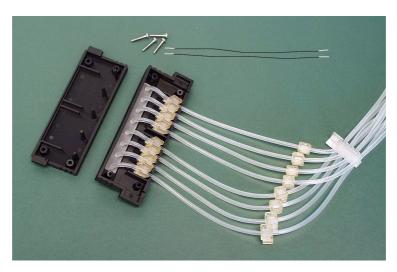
New tubing inserted into the lower part of the dispensing cassette
